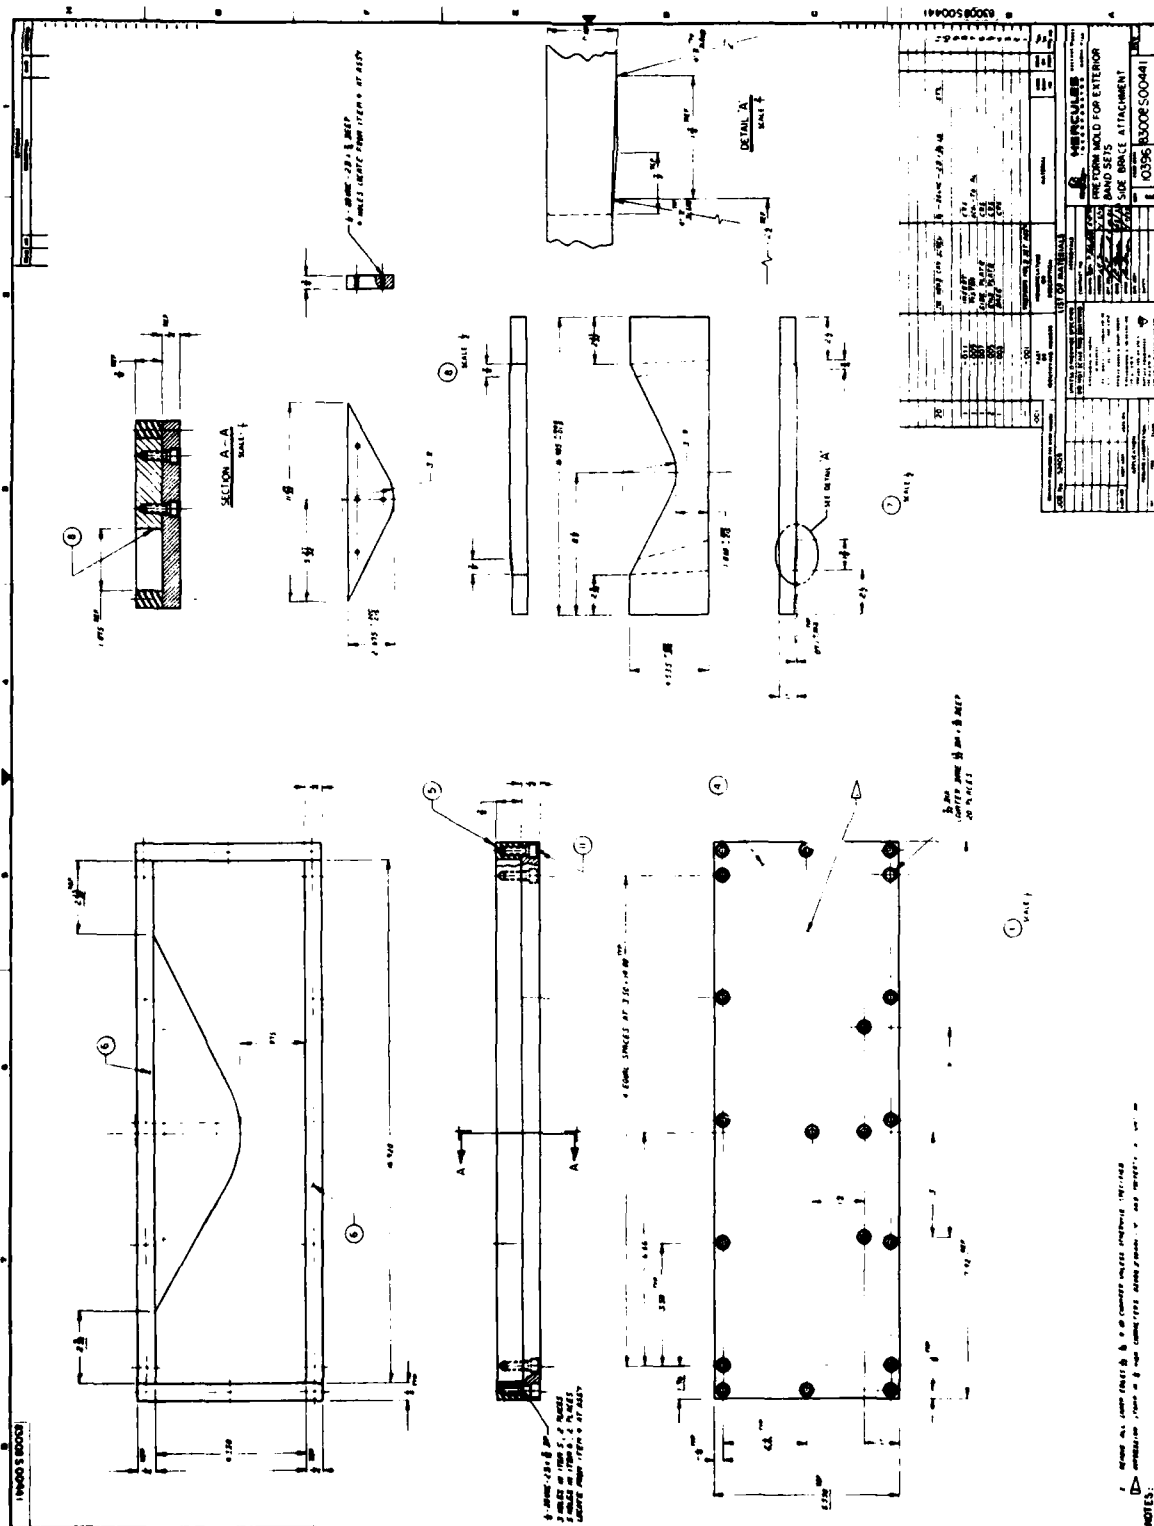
Exterior Band Set Mold, Side Brace Attachment, Drawing 83008S00441
